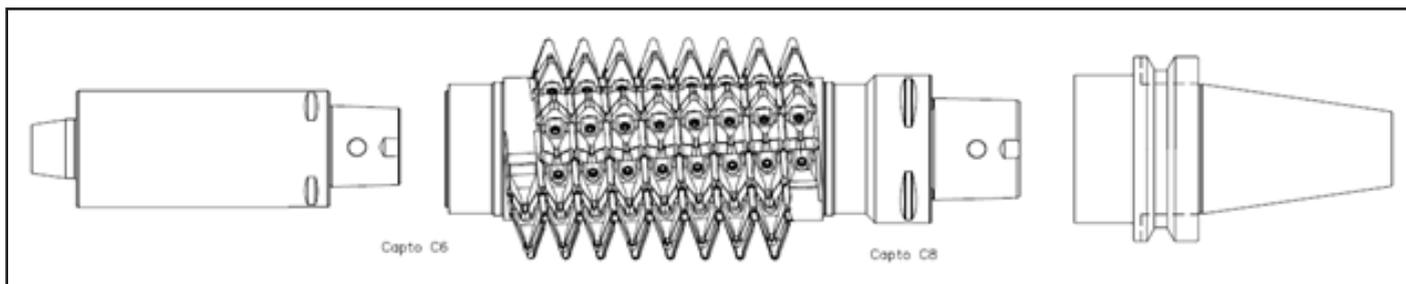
CM 176 Modular hob is equipped with Coromant Capto couplings. Only three parts are needed for tool assembly; Adapter to support side, CM 176 hob and adapter to spindle side.
